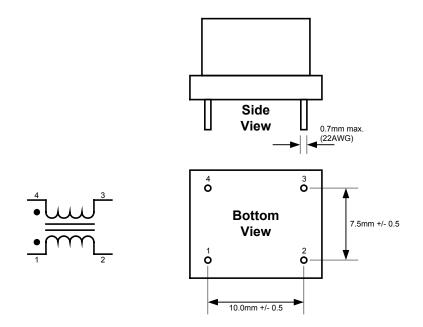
Schematic Drawing and Representative Mechanical Dimensions of Choke
